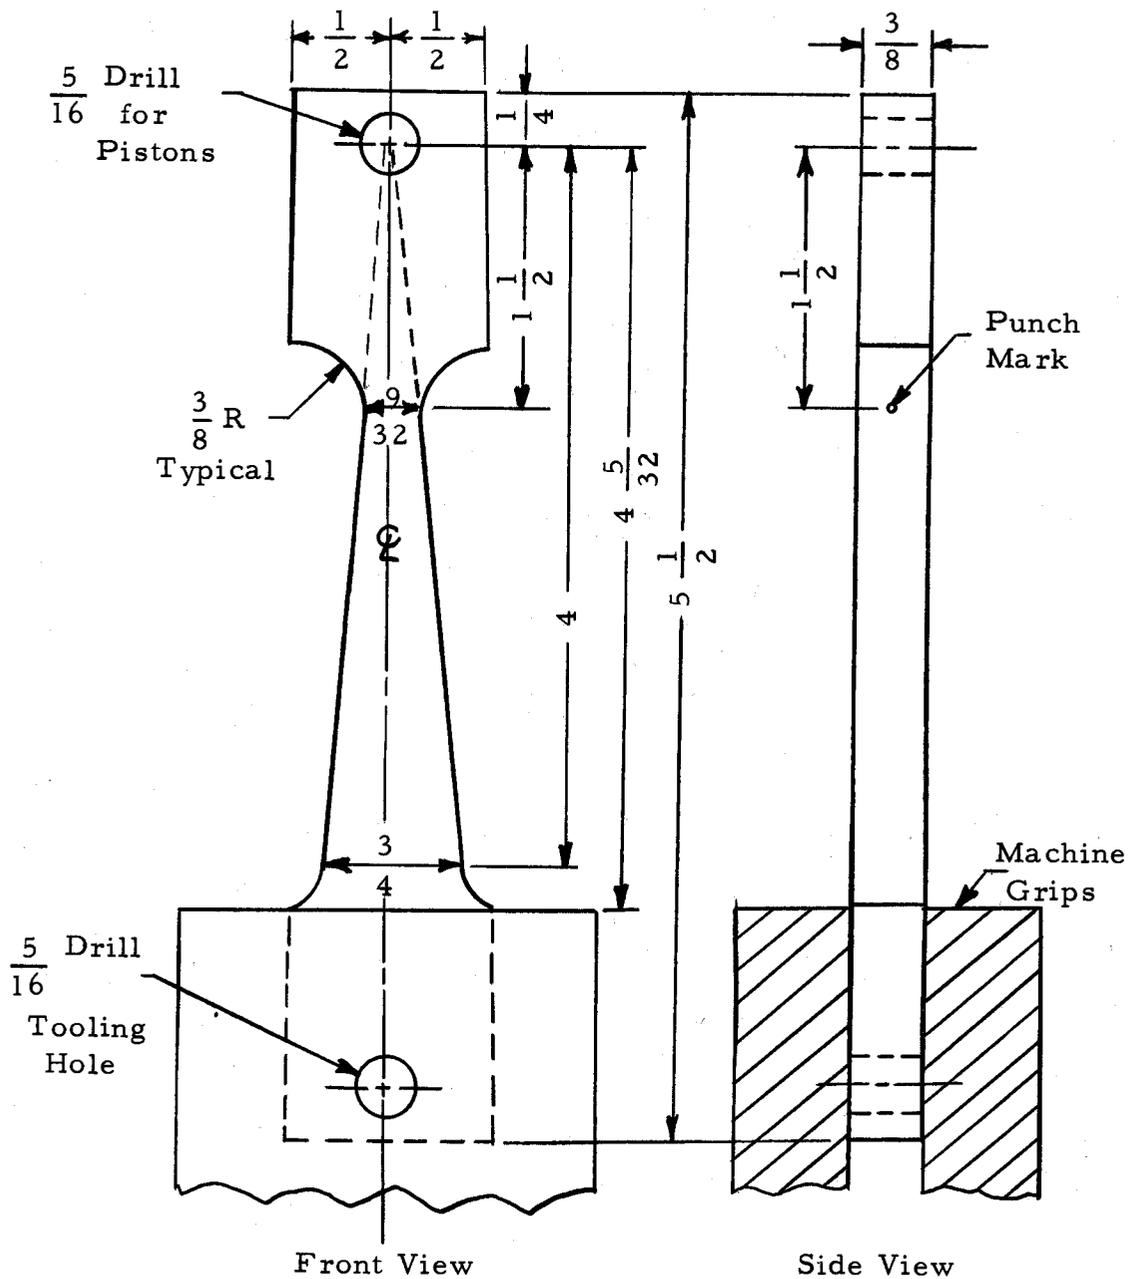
Constant stress cantilever fatigue specimen and mounting.
